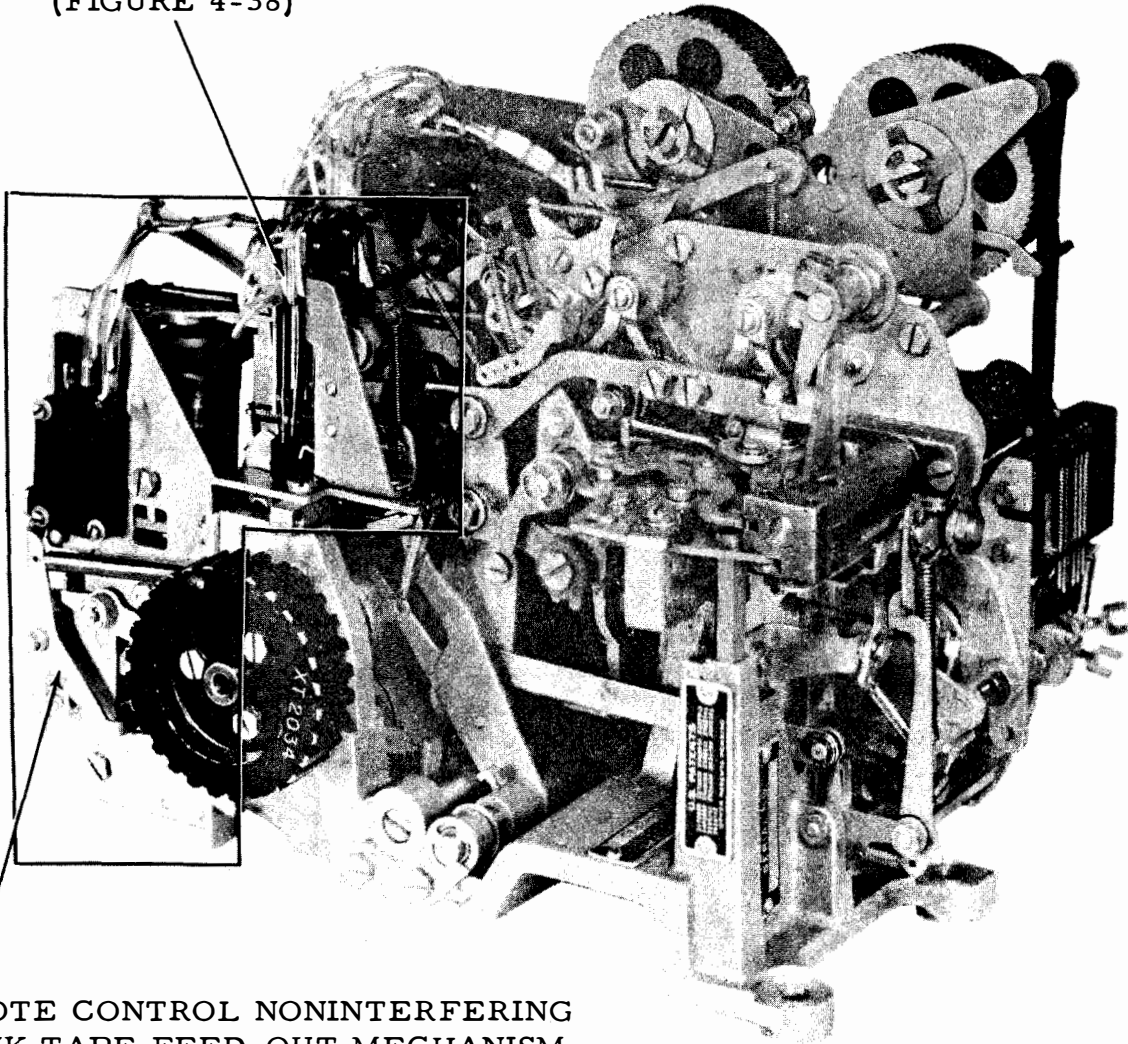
Remote Control Noninterfering BLANK Tape Feed-Out Mechanism (Sheet 5 of 5)
